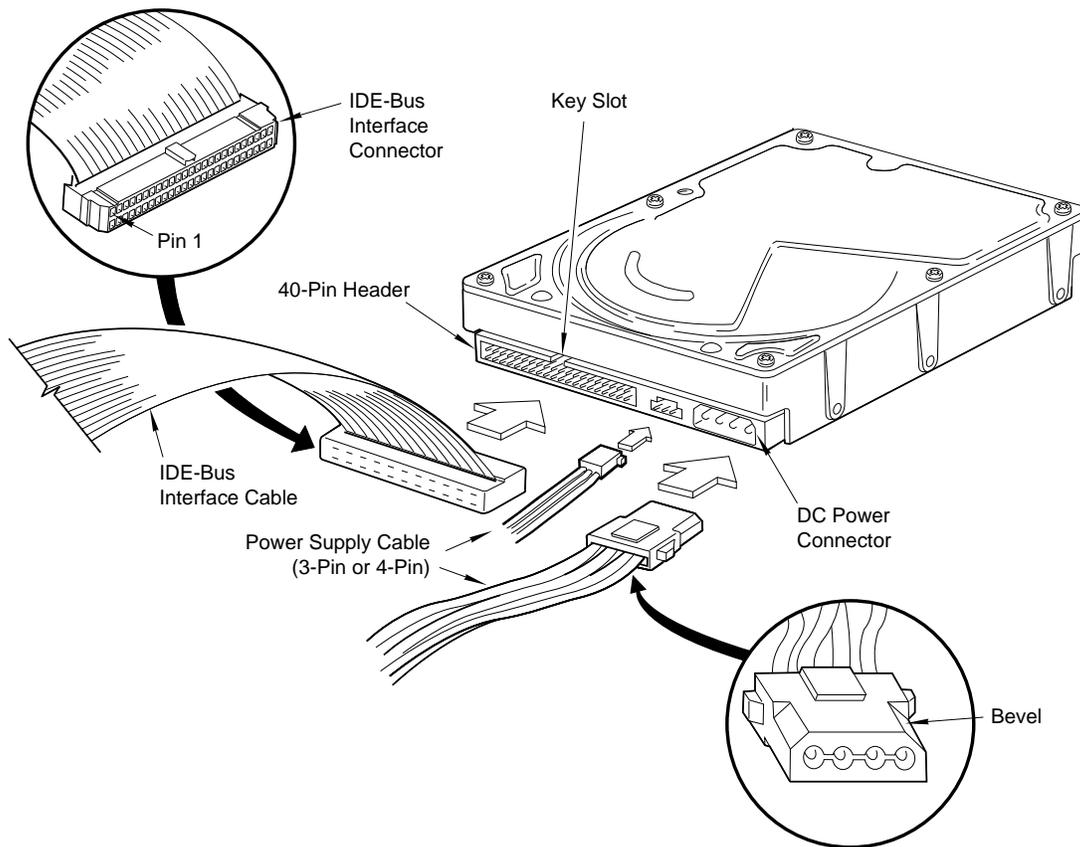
Drive Power Supply and IDE Bus Interface Cables
